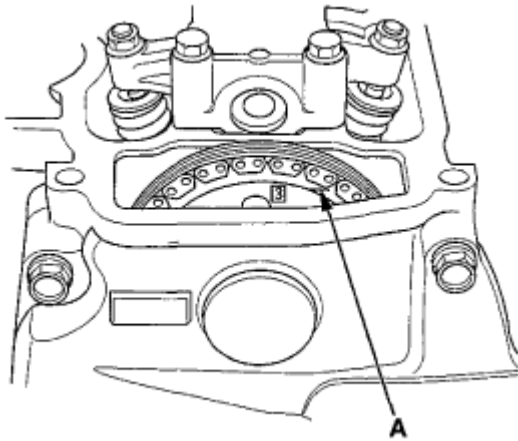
Aligning No. 3 Piston TDC Groove On Camshaft Sprocket With Top Edge Of Head
